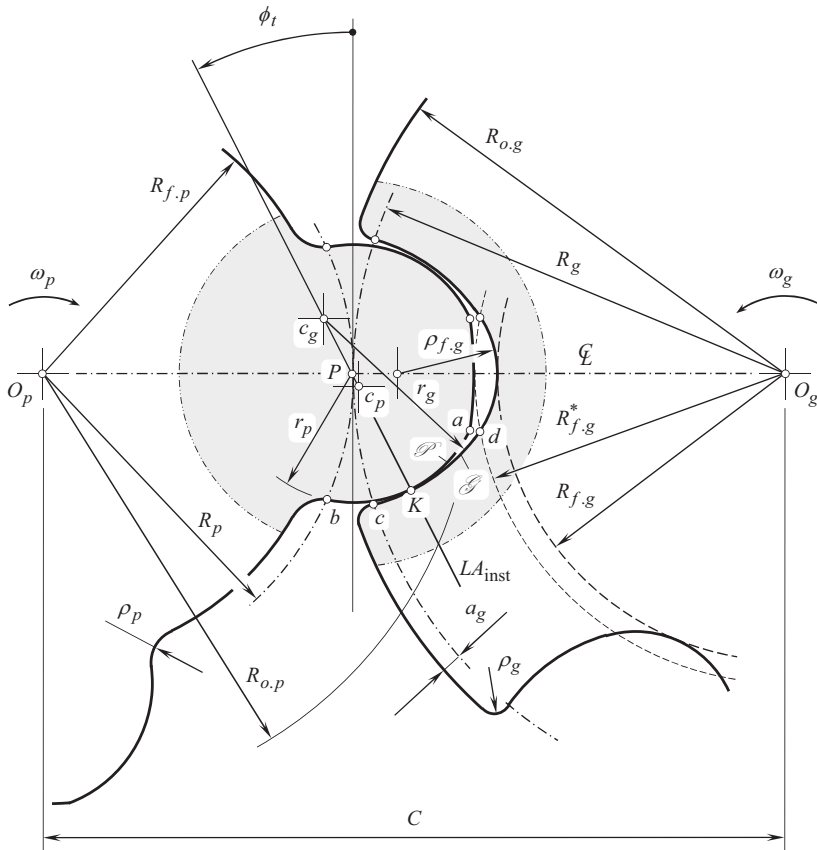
The kinematics, and the tooth flank geometry in parallel-axes *Novikov/conformal* gearing.
